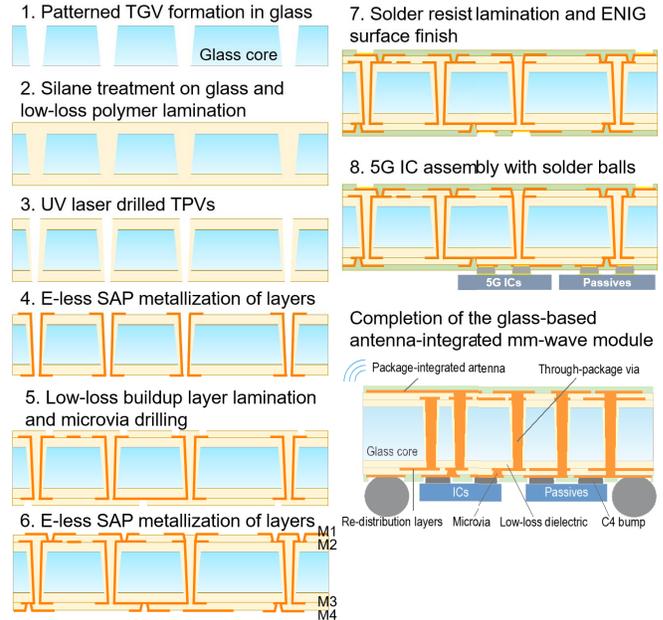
Fabrication process of highly integrated mm-wave packages with the via-in-via process, RDL formation, and the assembly of ICs and passive components.
